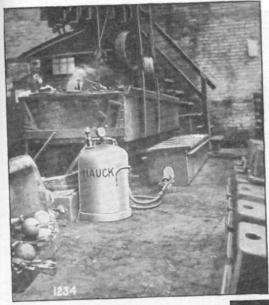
One method of baking molds which is accomplished by driving the flame into specially constructed sheet iron boxes lined with asbestos, causing the reflection of the heat to the molds under the boxes.
